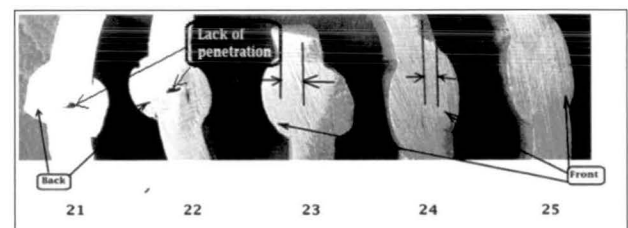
Penetration of weld-bead at welding speed 130 mm/min.
